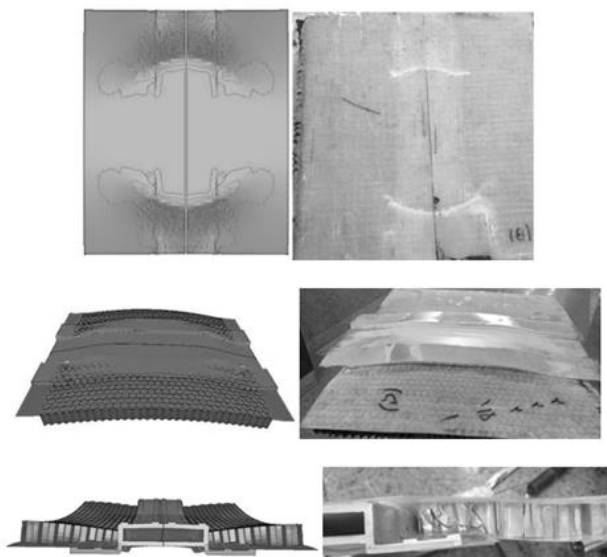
Failure modes after performing bending test on the plates with connection type 1 (Numerical and experimental)
